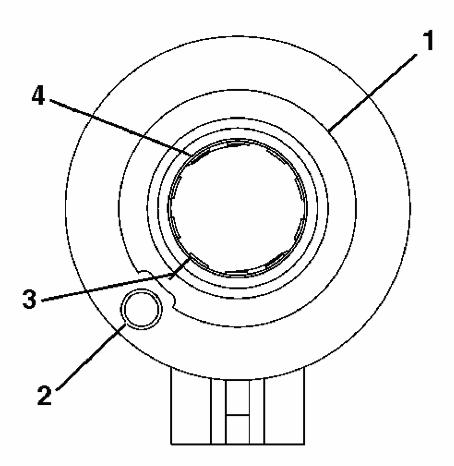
Steering Wheel Position Sensor Identification Points (With Flush Rotor Flange Cuff & Foam Ring)
